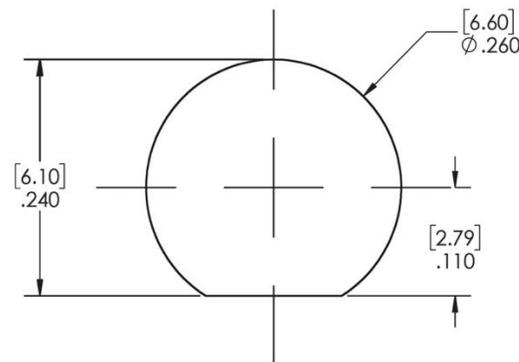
Recommended mounting hole for 1/4-36UNS-2A threaded antenna with flat
